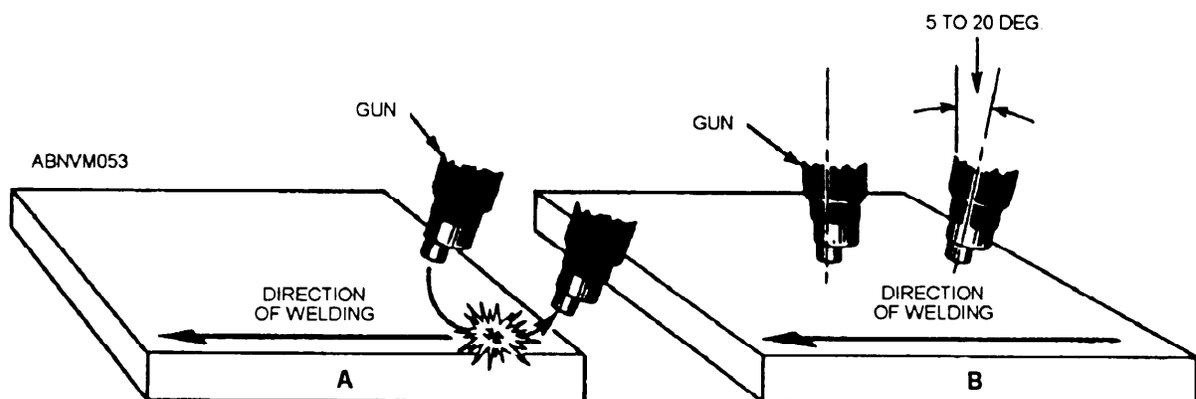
GMA welding. (A) Striking the arc. (B) Gun angle.
